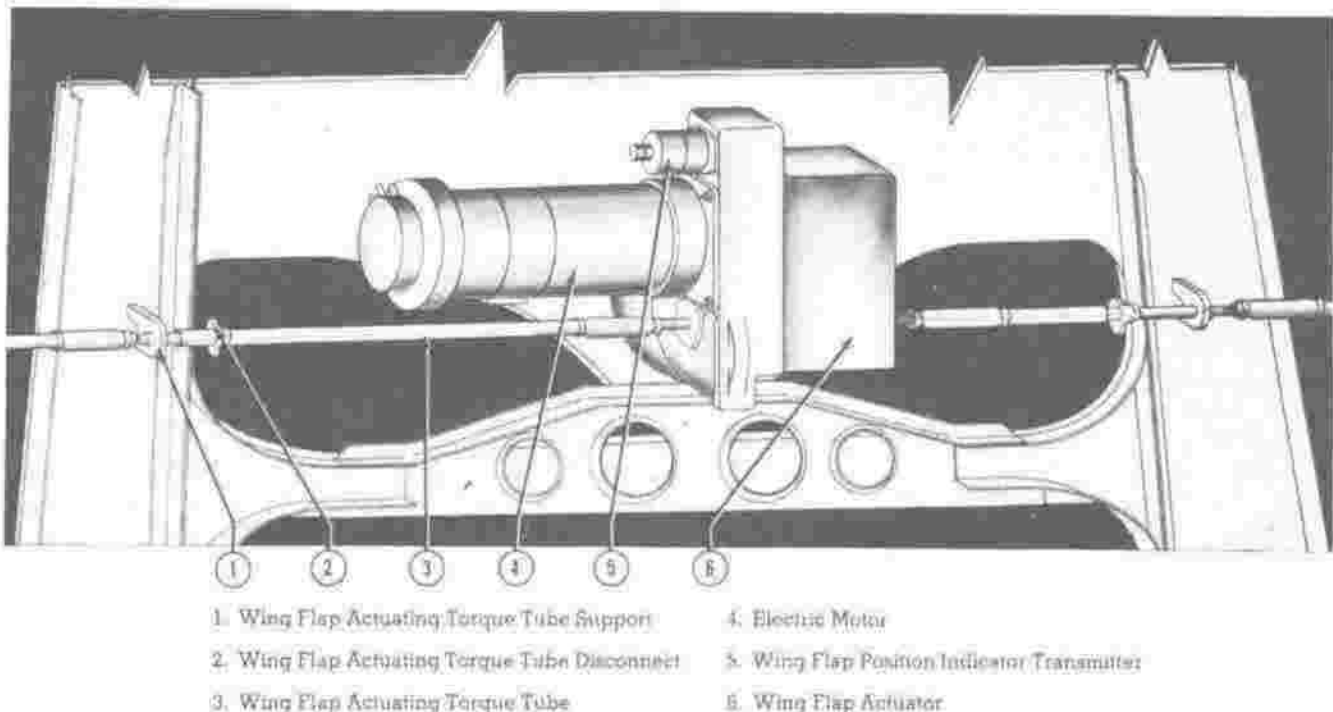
Wing Flap Operating Mechanism in Bomb Bay
